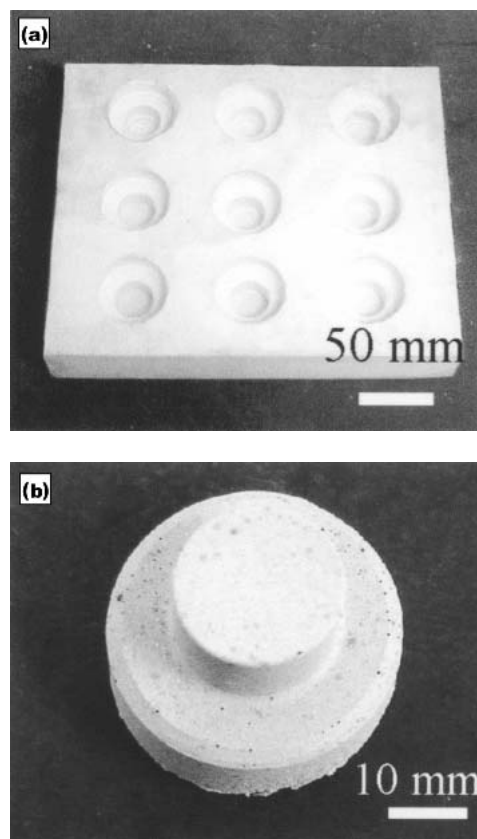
Ceramic components: (a) casting ladle and (b) crucible
